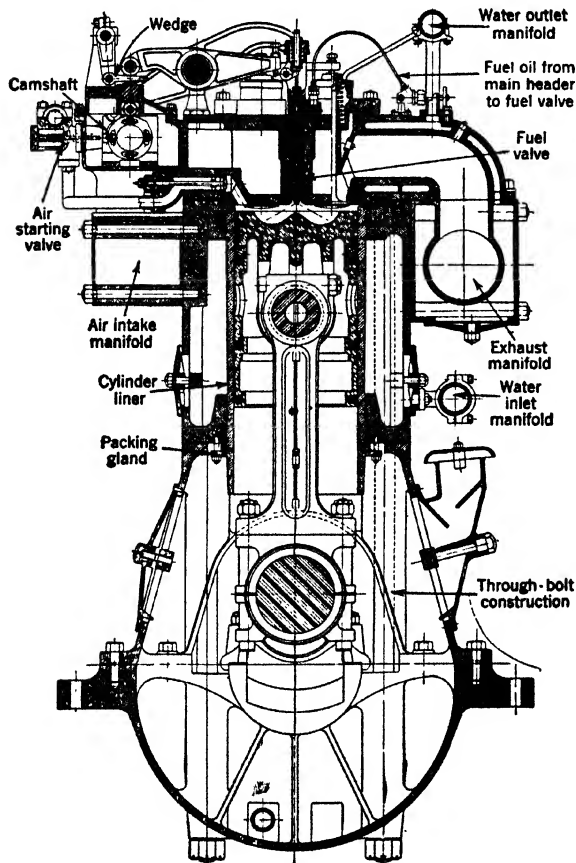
Winton four-stroke cycle high-speed Diesel engine.
